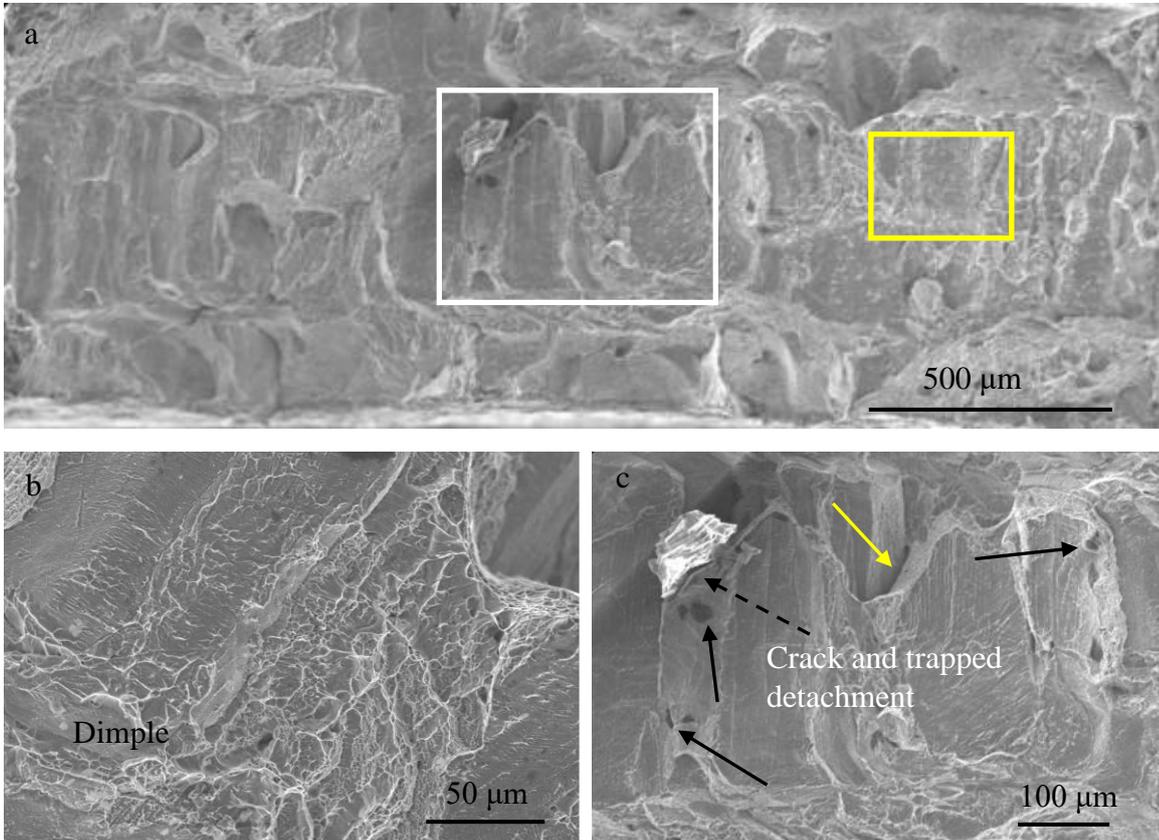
(a). Large area image of fracture surfaces of tensile sample (Vertical- build direction Z, horizontal- Y); (b) magnified view of yellow rectangle showing region with predominantly ductile fracture and (c) magnified view of white rectangle showing region with predominantly brittle fracture (cleavage facets). Black solid arrows indicate examples of pores with tear ridges around some of them.
